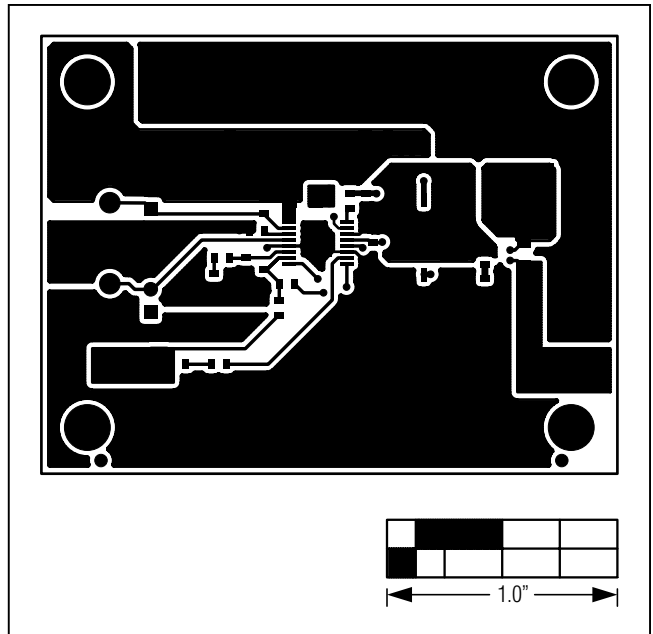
MAX16952 EV Kit PCB Layout—Component Side
